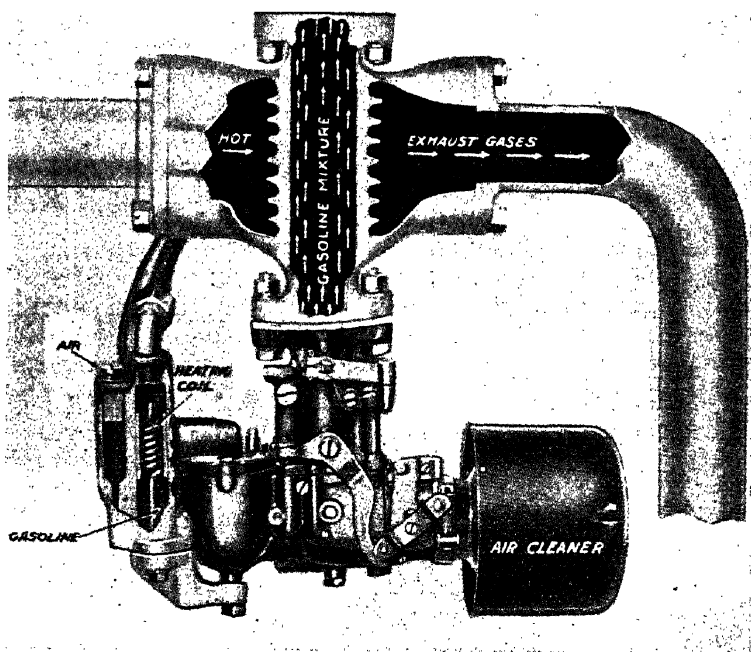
The Exhaust-heated Franklin Carburettor, showing Electric Heater for Starting and the Air-Cleaner.
